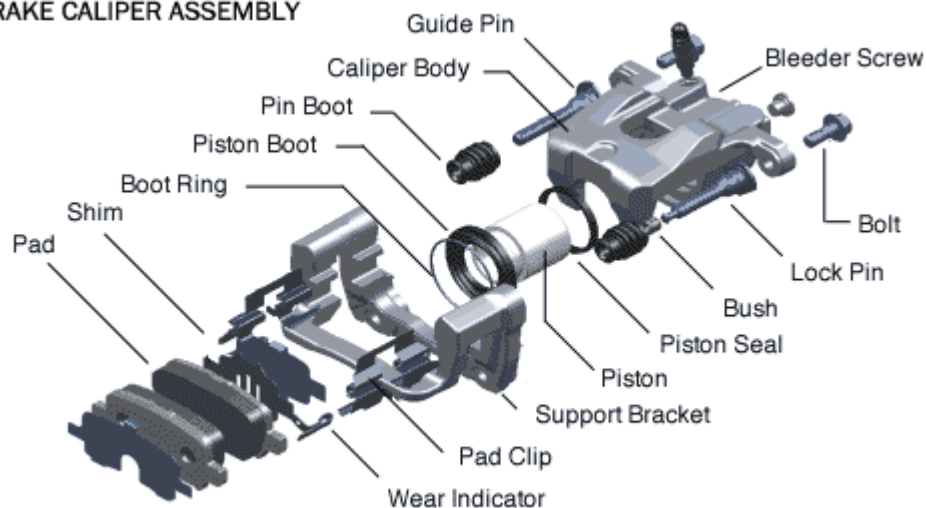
Faulty Brake Caliper and Exploded View (www.akebonobrake.com).
